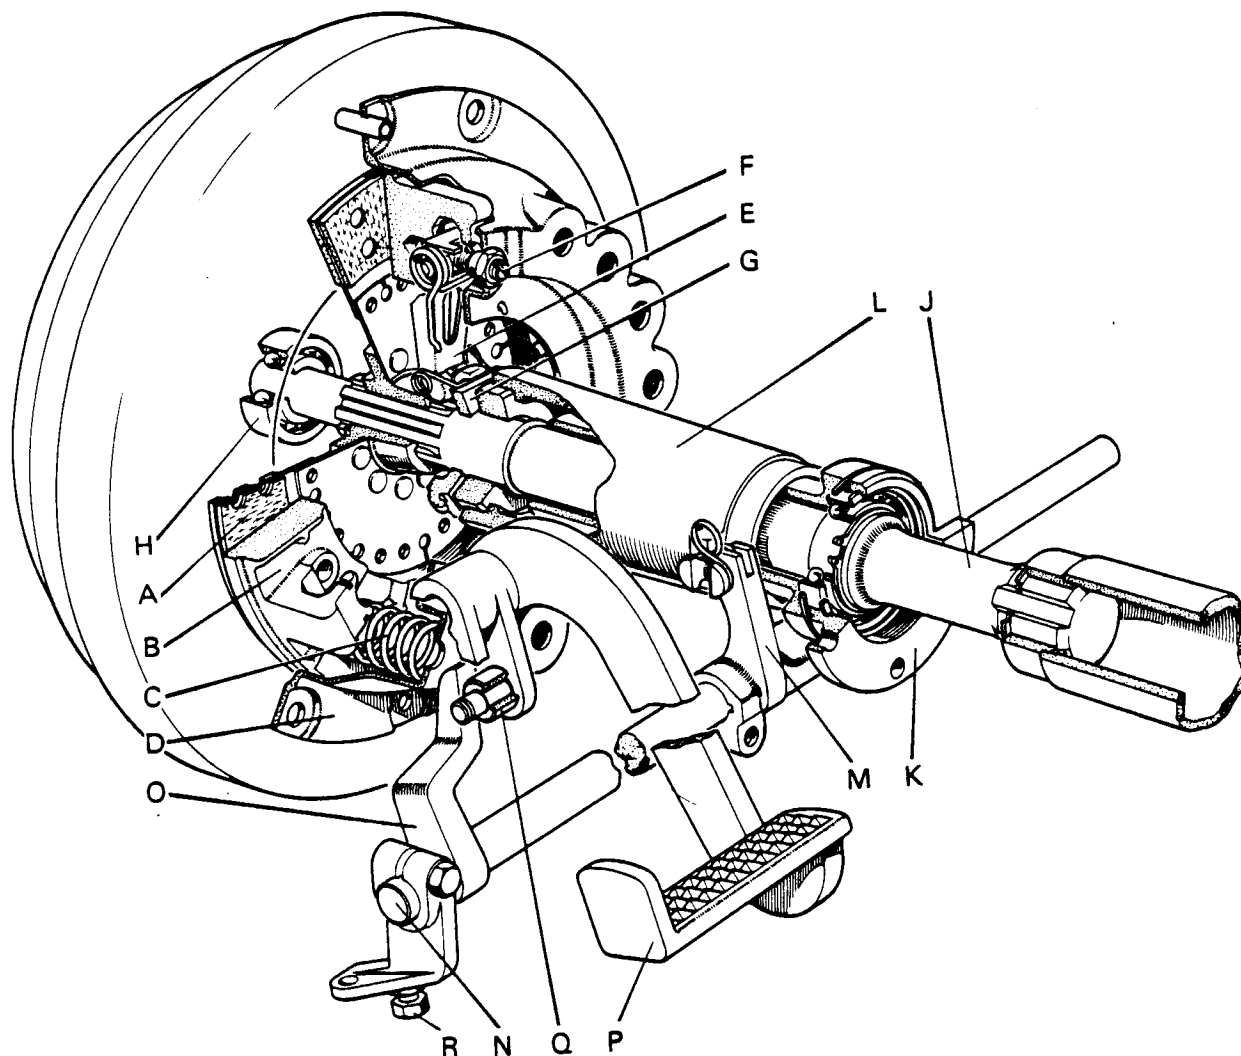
SINGLE PLATE CLUTCH — 990/880 TRACTORS
